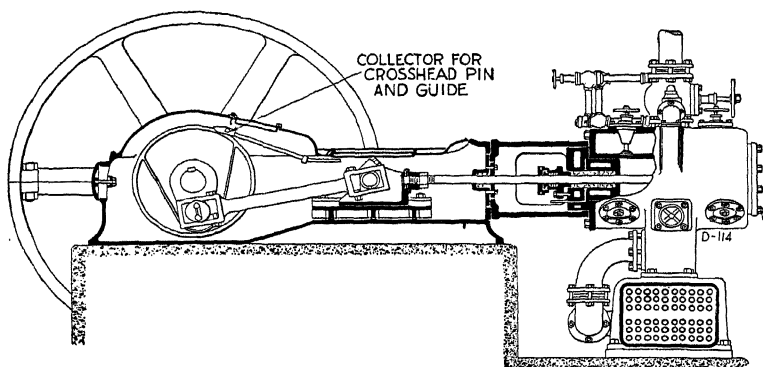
Ammonia compressor with mechanical-force feed to cylinder and splash to bearings. (Courtesy Socony-Vacuum Oil Co.)
